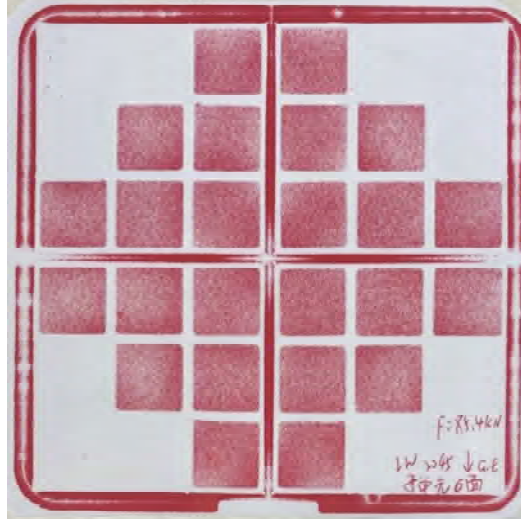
The clamping footprint of inner sub units and framework under 85kN
